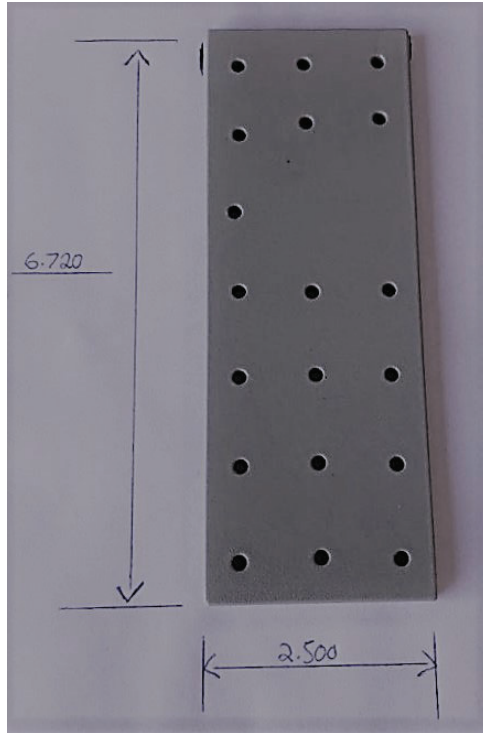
Doubler Details (0.250" Thick 2024-T3)
